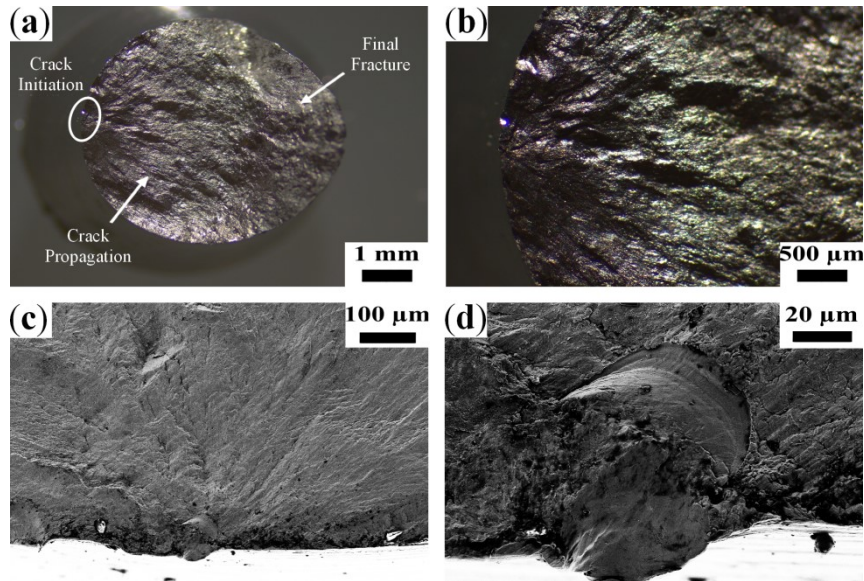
Fatigue fracture surfaces of horizontal stress relieved Ti-6Al-4V specimen observed by stereomicroscopy (a,b) and FESEM analysis (c,d): (a) overall fracture surface showing the crack initiation site, the crack propagation and final fracture areas; (b-d) crack initiation site observed at progressively higher magnification.
